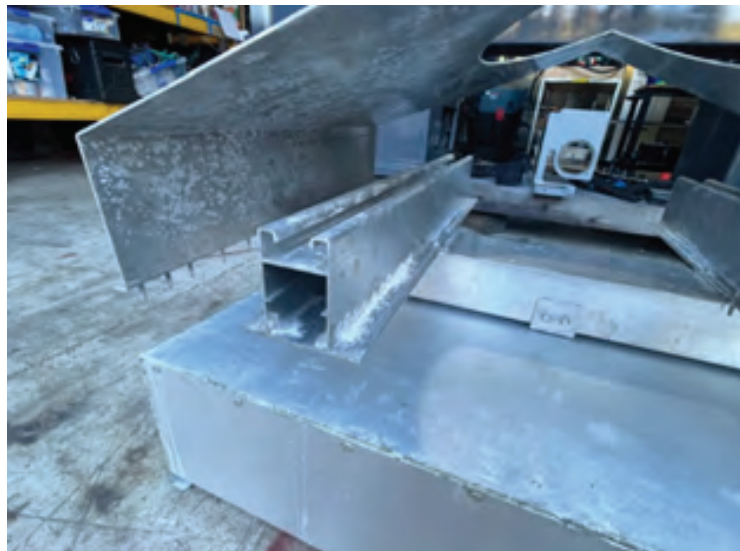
GALVANIC TEST PIECE AFTER TESTING SHOWING CORROSION TO PRODUCT
